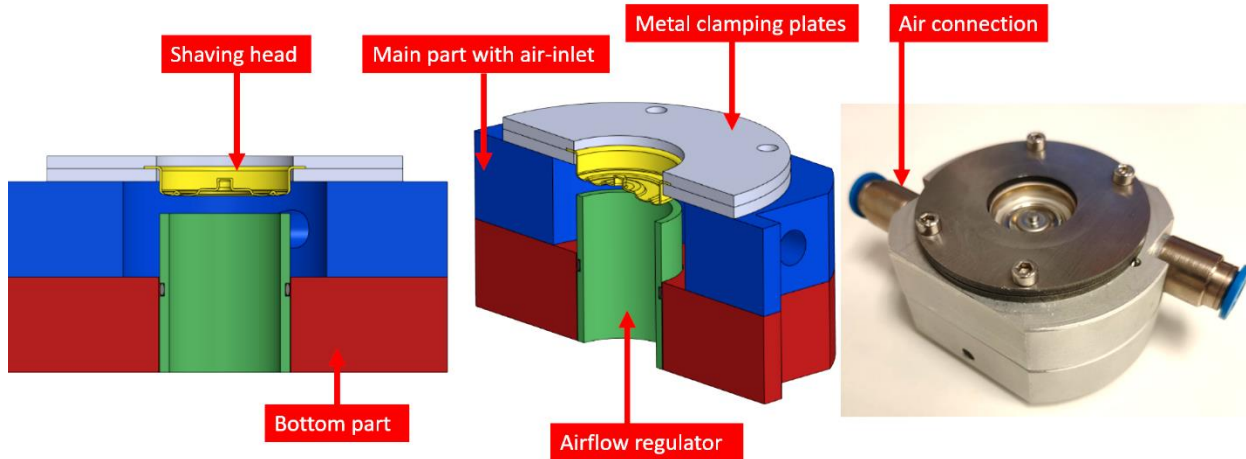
Sample holder with a shaving head. Colours represent different parts of the sample holder. Blue: main part with air-inlet, red: bottom part, green: airflow regulator, grey: metal clamping plates, yellow: shaving head.
